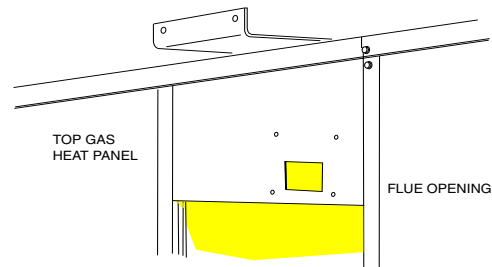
INSTALLED TOP GAS HEAT PANEL
